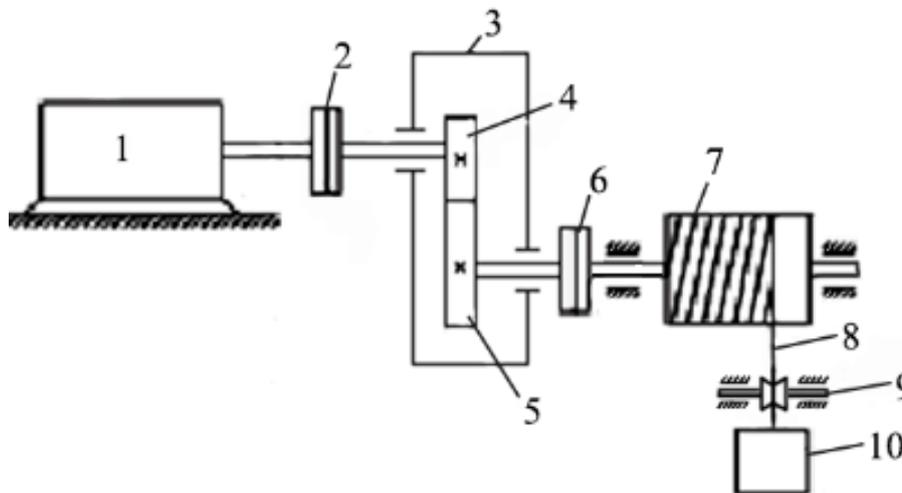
A principal scheme of lifting installation: 1 – electric engine; 2, 6 – clutch; 3 – reducer; 4 – gear; 5 – gear wheel; 7 – drum; 8 – rope; 9 – pulley; 10 – lifting vessel.
